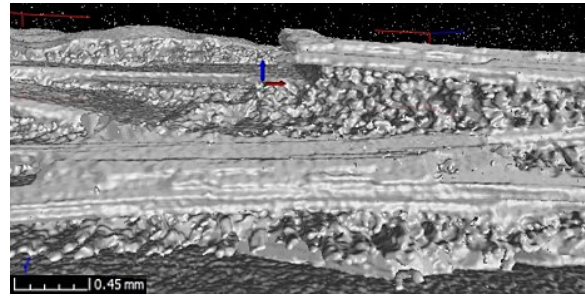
View of the structure after conducting a mechanical test – sample number 2
